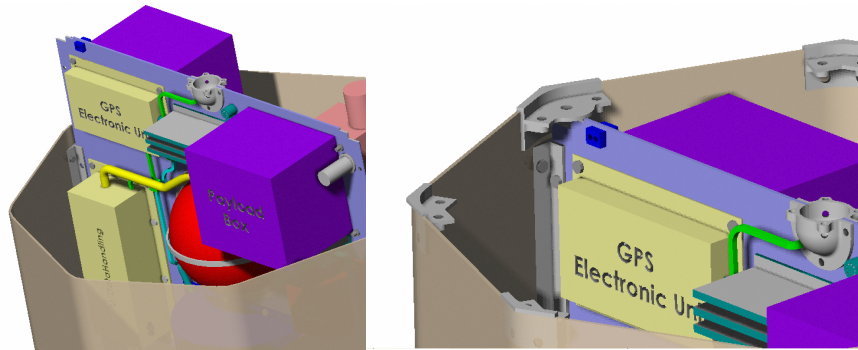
Assembly of the vertical partition into the tube and the mounting of the brackets on the tube once the shelf is assembled.
